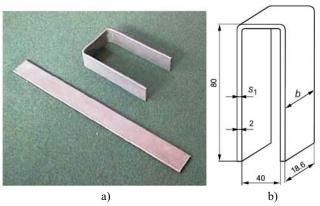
Shape (a) and dimension (b) of test-piece Slika 3. Oblik (a) i dimenzije (b) epruvete
